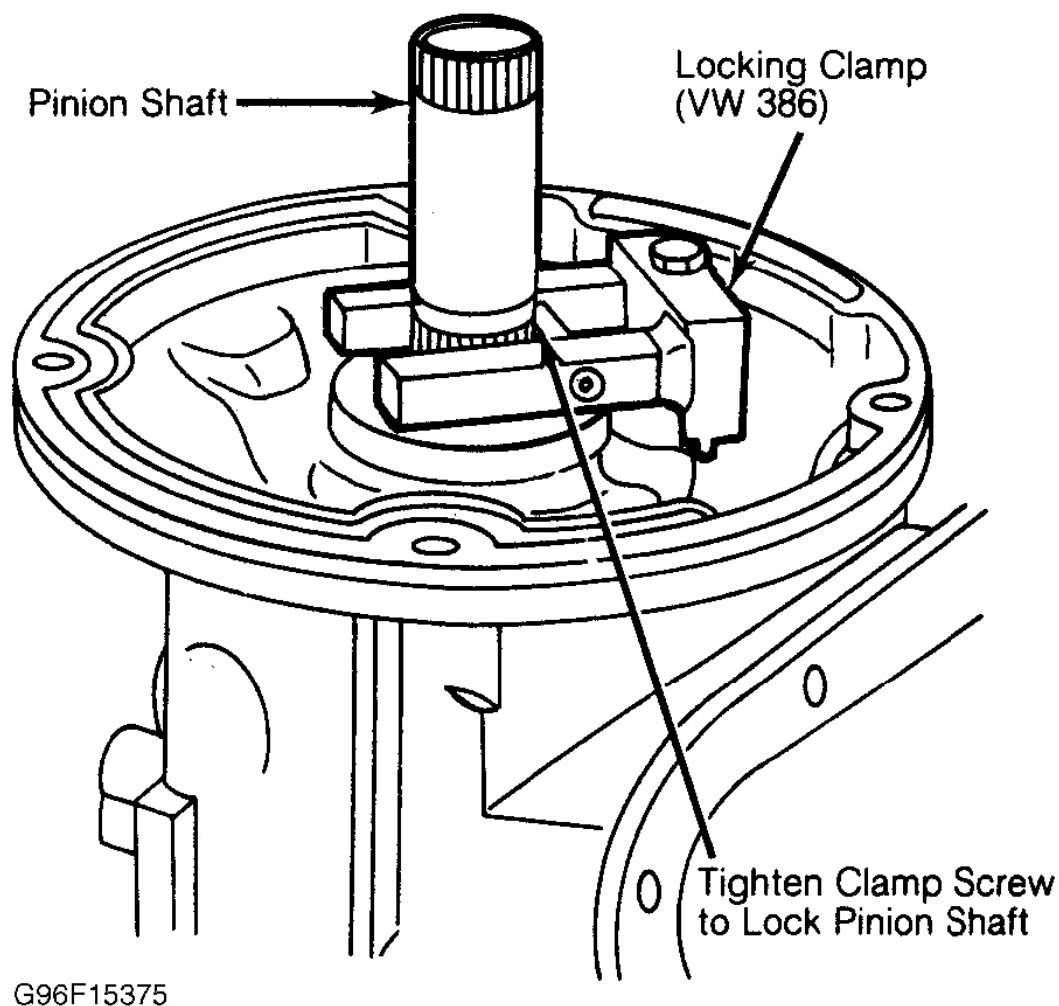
Attaching Locking Clamp To Pinion Shaft
